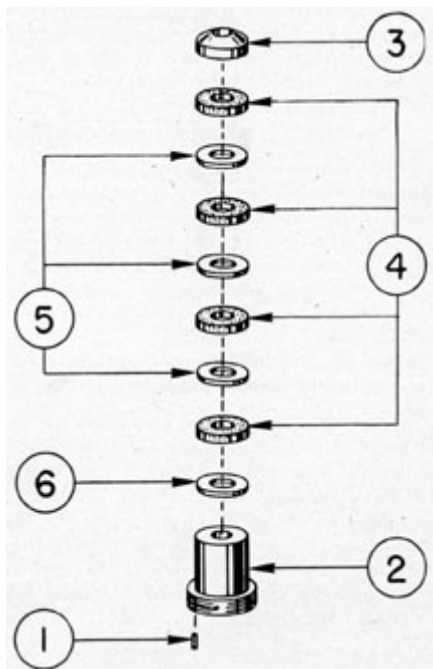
Stadimeter transmission shaft packing gland assembly (modified hycar type).
